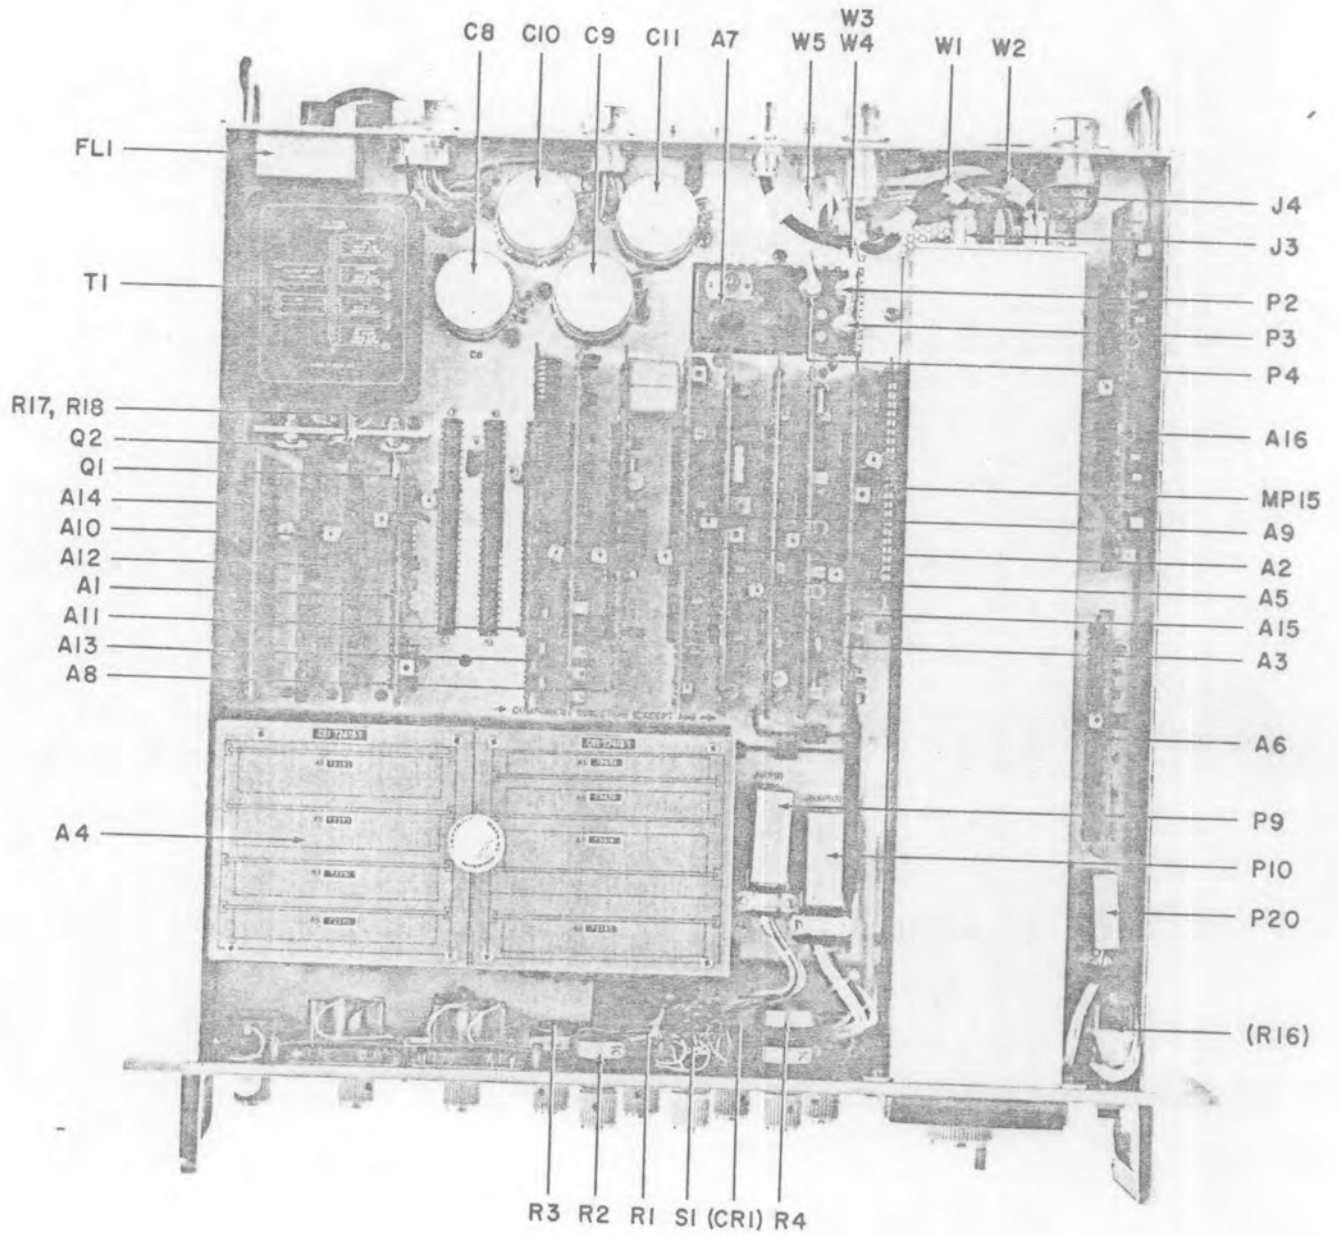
Type 215 Receiver Top View, Location of Components.
